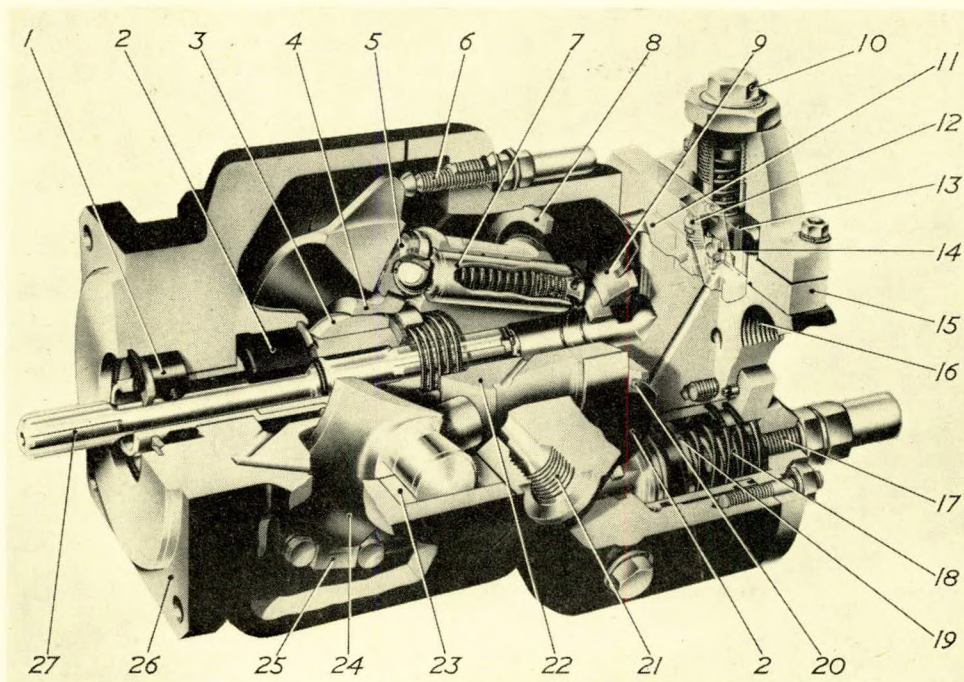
I.P. 525 hydraulic pump (perspective cut away view)
